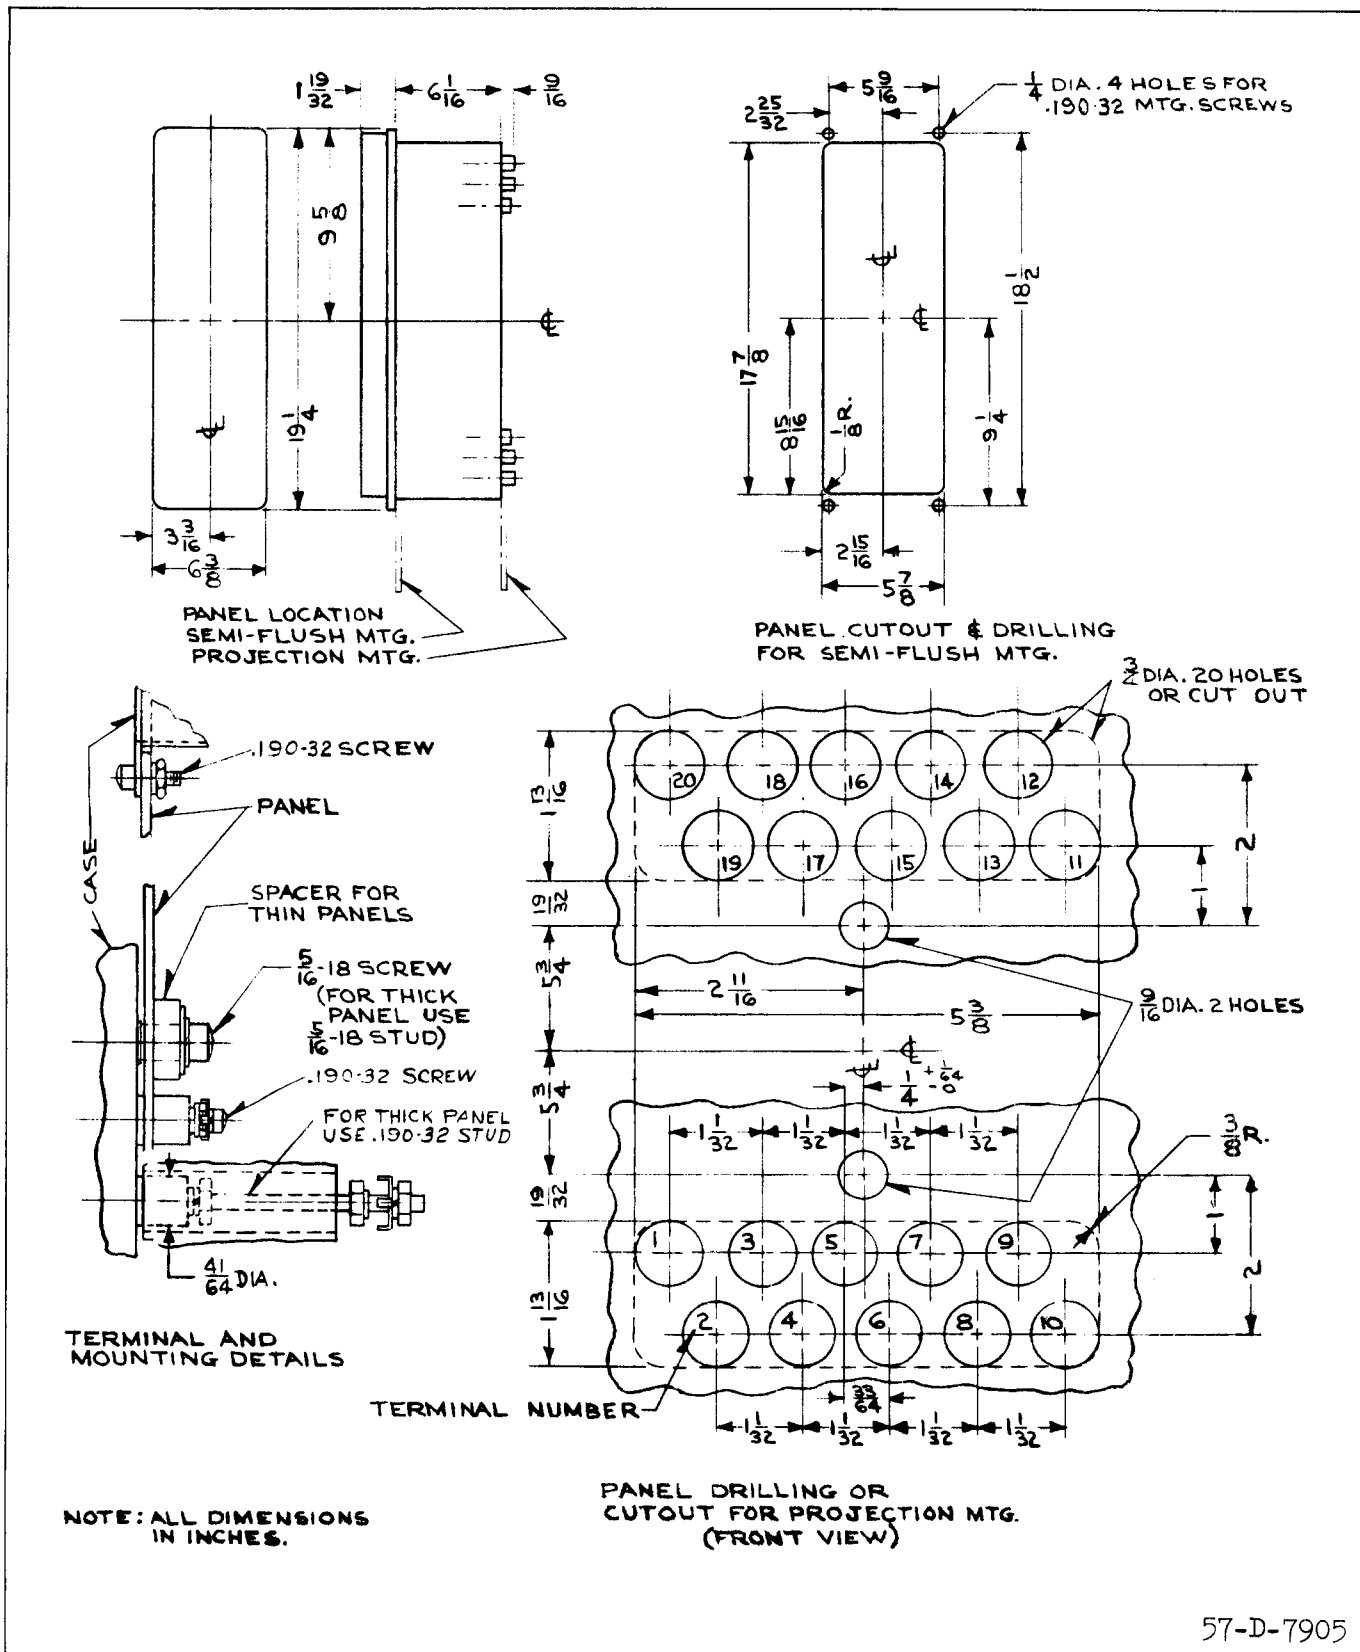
Outline and Drilling Plan for the Type FT32 Case
